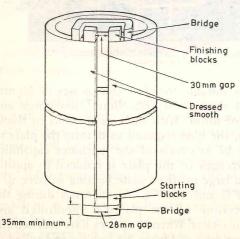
Sketch of cylinder showing starting and finishing blocks used in the electroslag welding process
